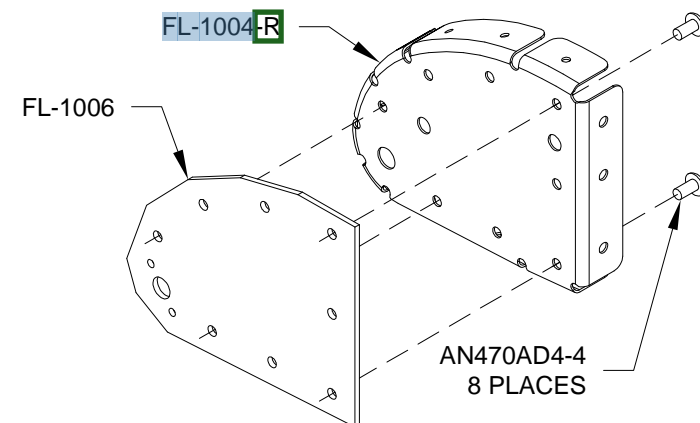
INBOARD ROD END RIB SUBASSEMBLY
